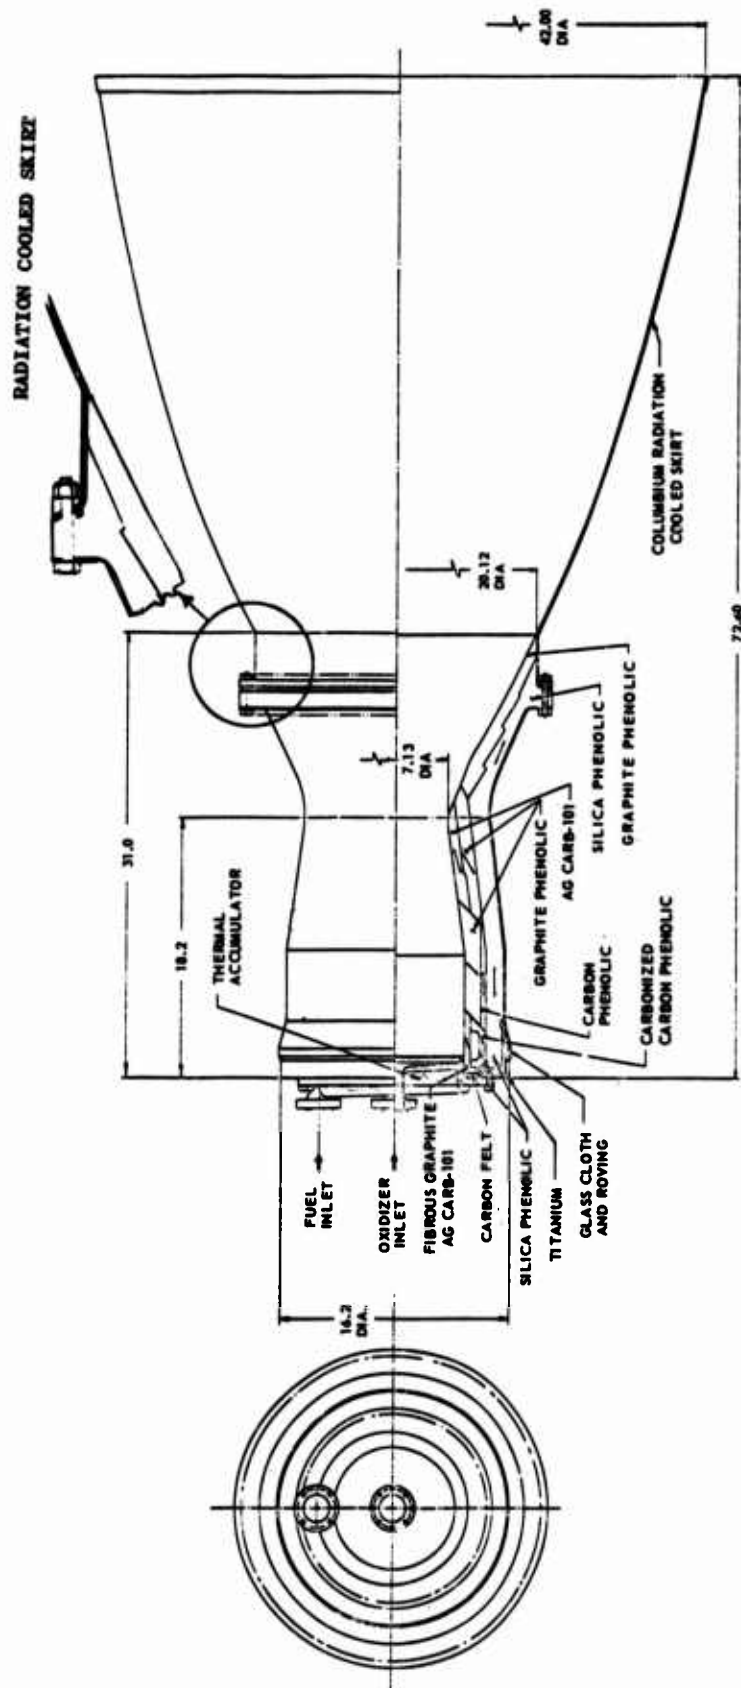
Conceptual Design of Flightweight Thrust Chamber Assembly
